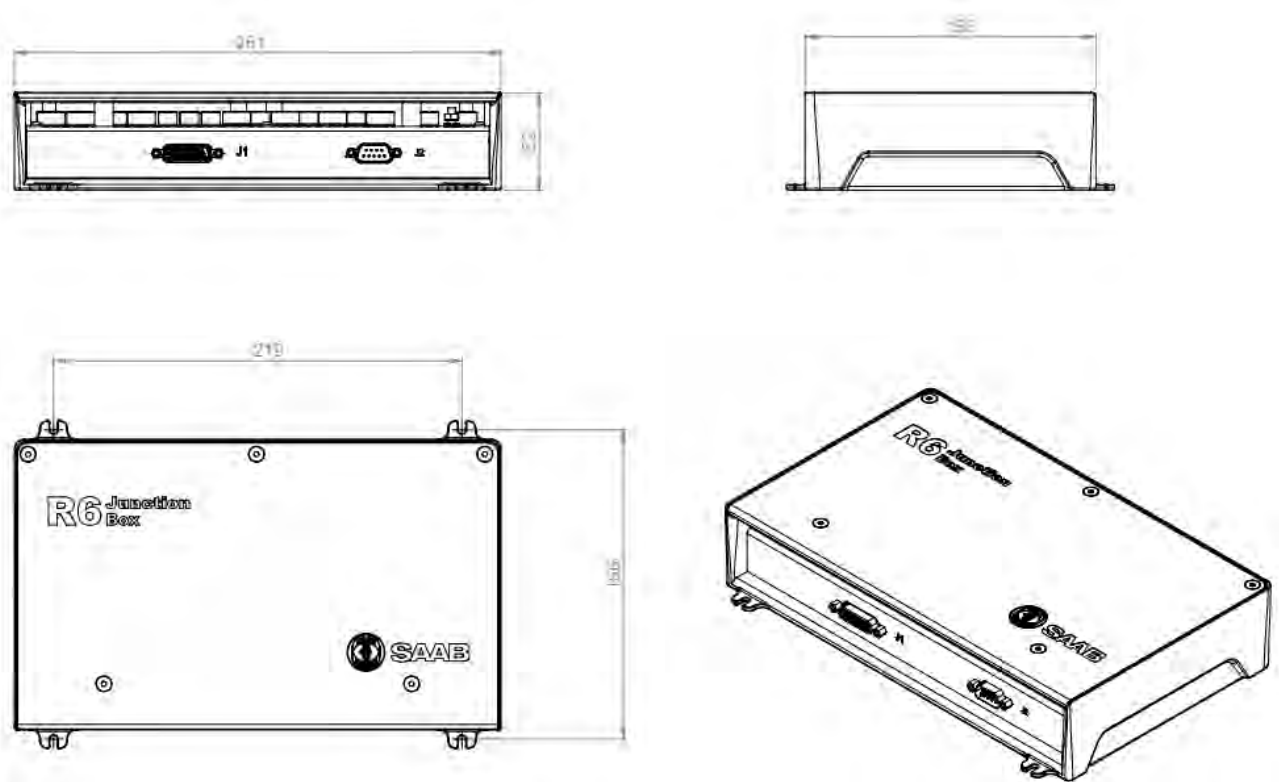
R6 AIS Junction Box, Dimensions [mm]
